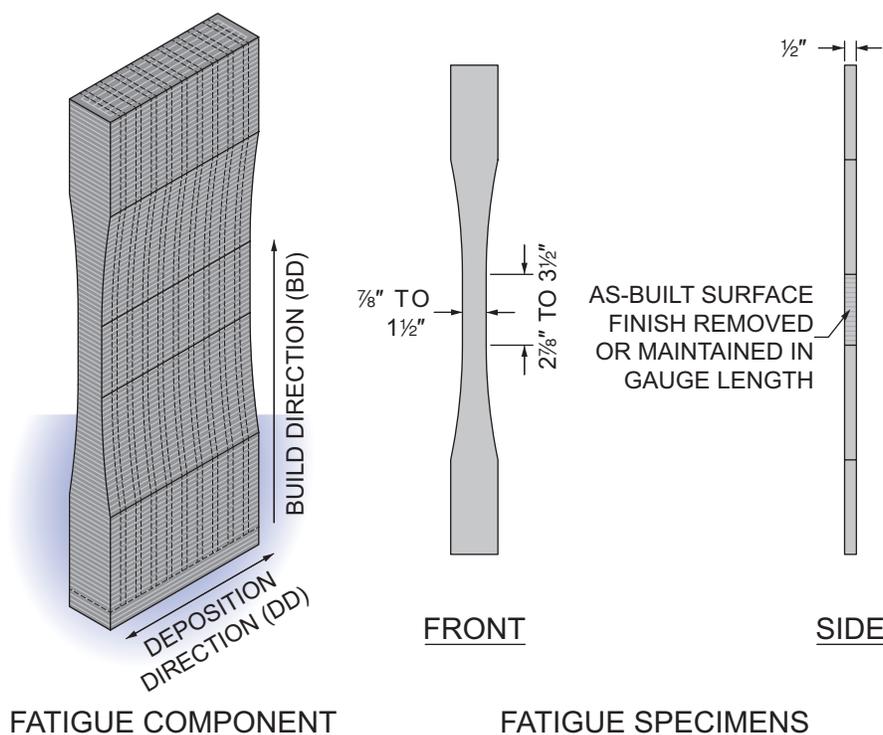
Fatigue component fabrication schematic with specimen front and side views.
